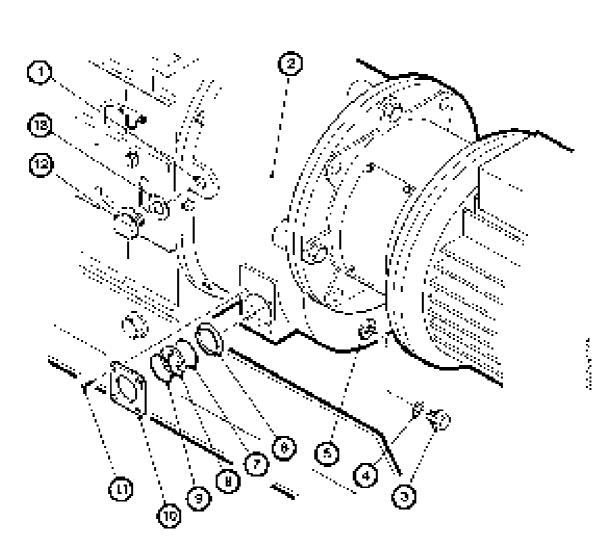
Oil-level sight-glass and oil filler and drain ports
